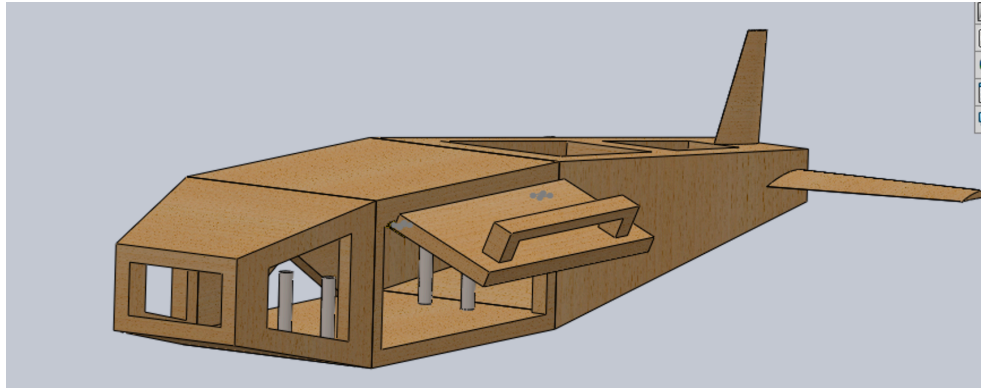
5 3D model of fuselage showing all parts assembled.
